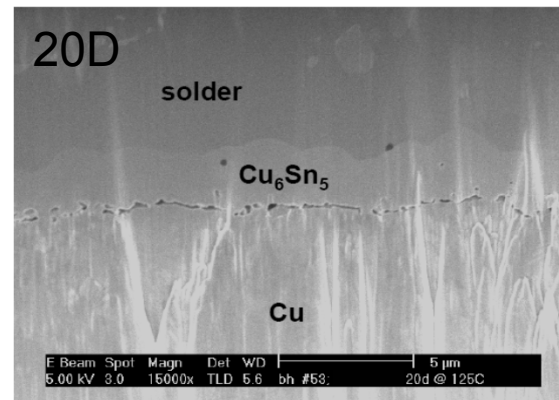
Package pad to solder joint interface after 20 days of 125°C aging. The Kirkendall voids have become so prevalent that a nearly continuous voided layer has formed.
